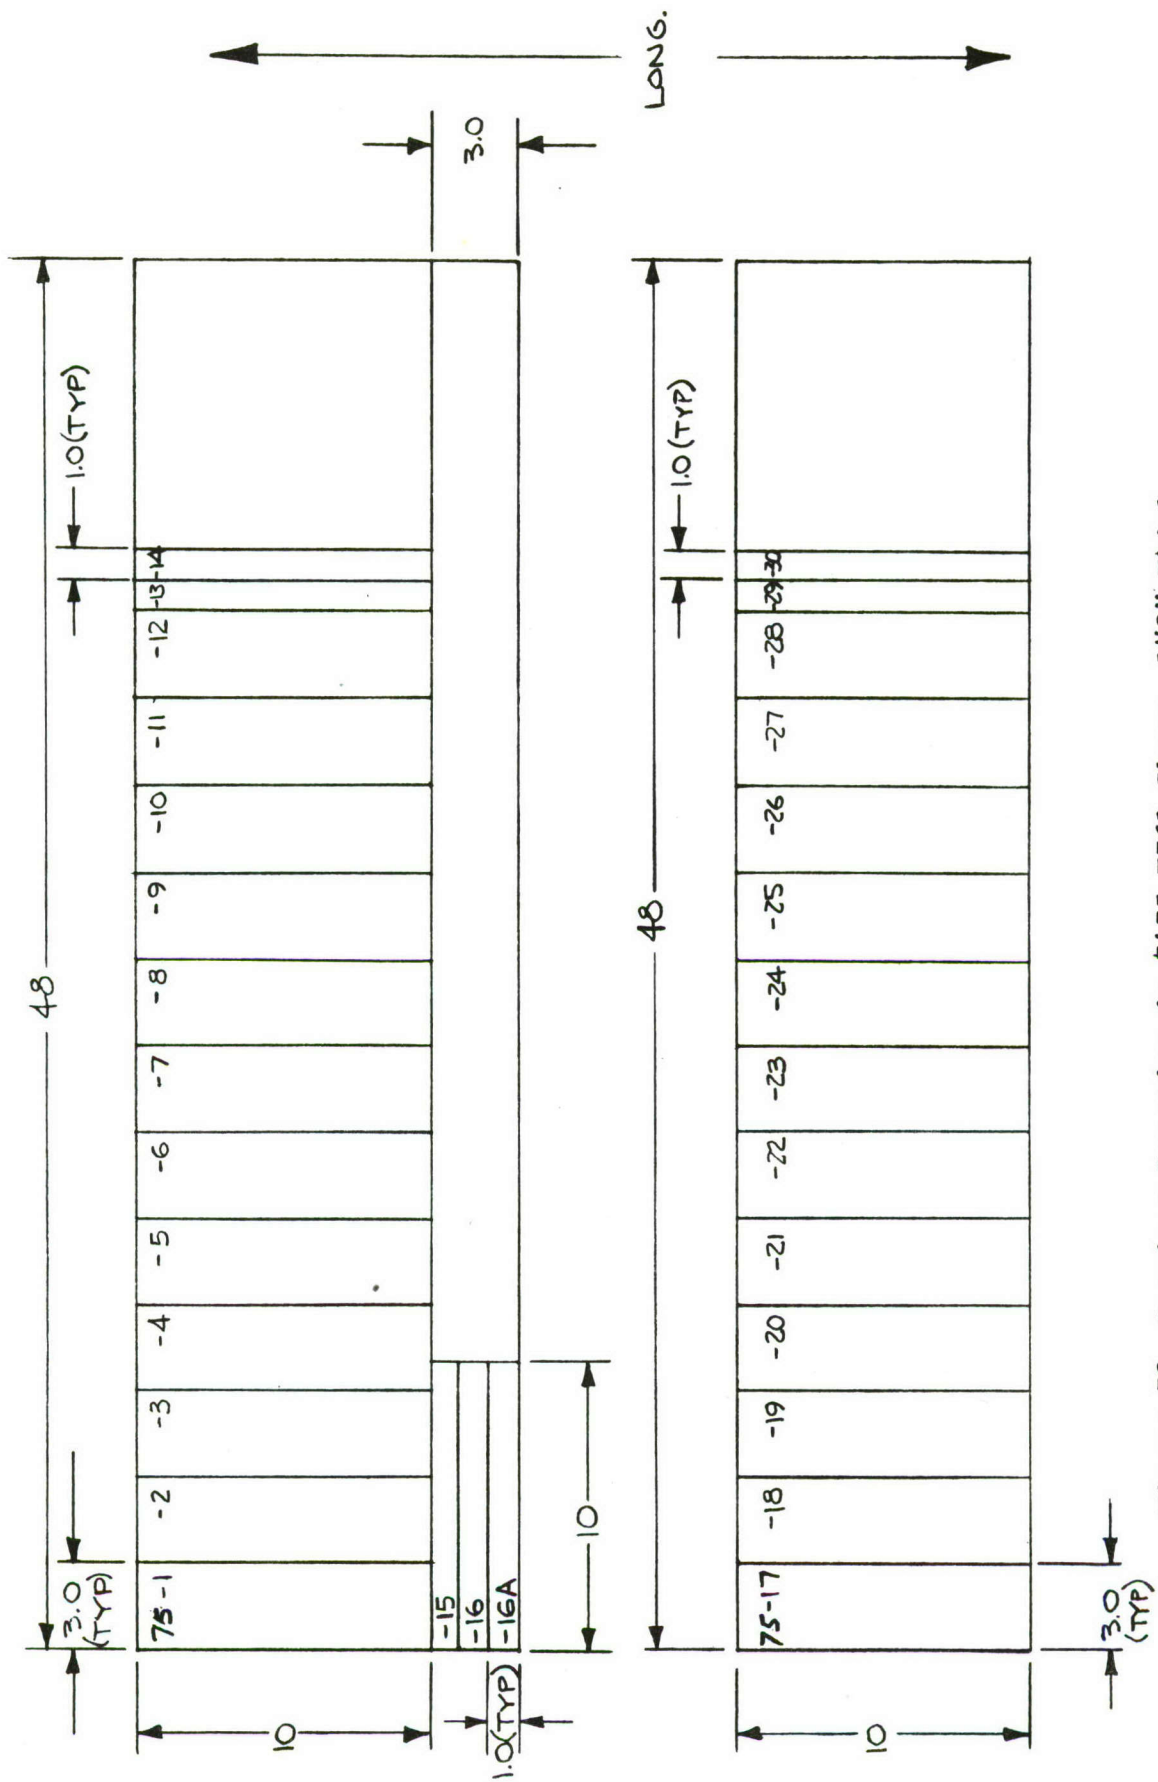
Specimen Location in 7475-T761 Sheet, 1/8" Thick
